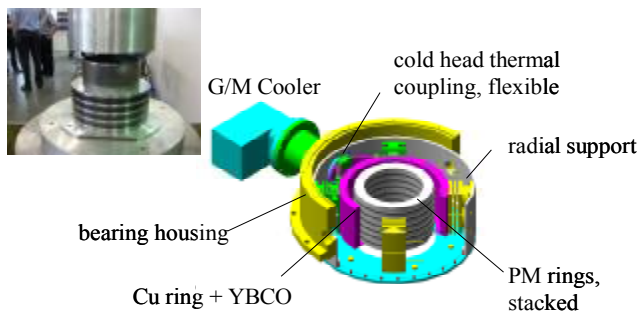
Schematics of the HTS bearing structure with cold head; the insert shows part of the assembled PM rotor
